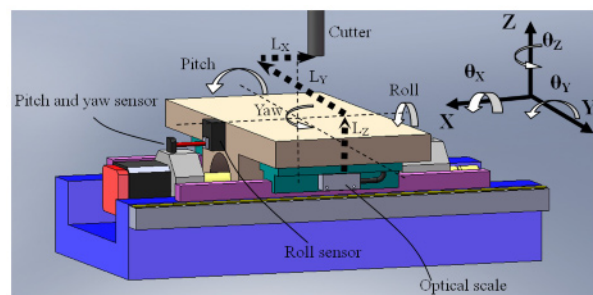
On machine tool mounting of the 3-axis angle sensor
